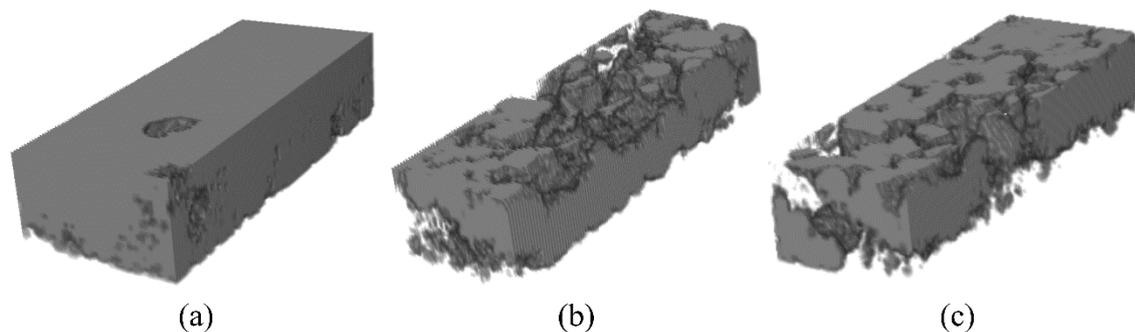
3D X-ray tomography of solder joint, a) new device, b) aged device under APC test, c) aged device under ATC test.
